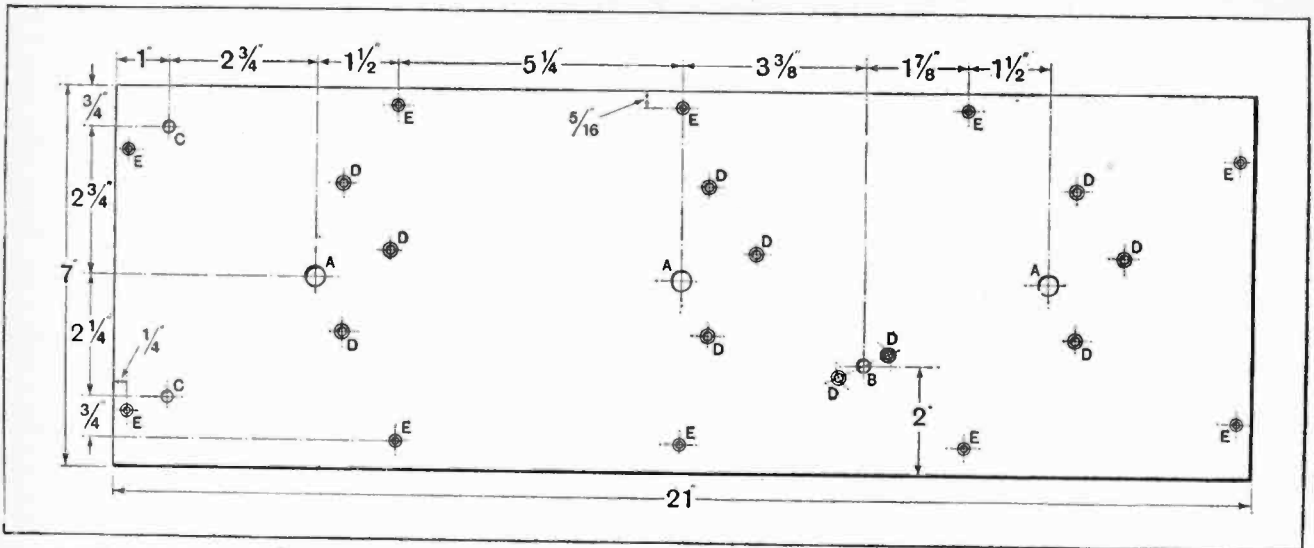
Details for drilling the panel of Unit B. Sizes of holes: A, 1/2in.; B, 1/4in.; C, 5/32in.; D, 5/32in. and countersunk for 4BA screws. E, 1/8in. and countersunk for No. 4 wood screws.
